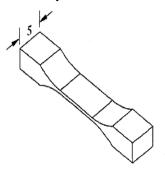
Template for fabricating dog-bone shaped micro-specimens through polishing.
